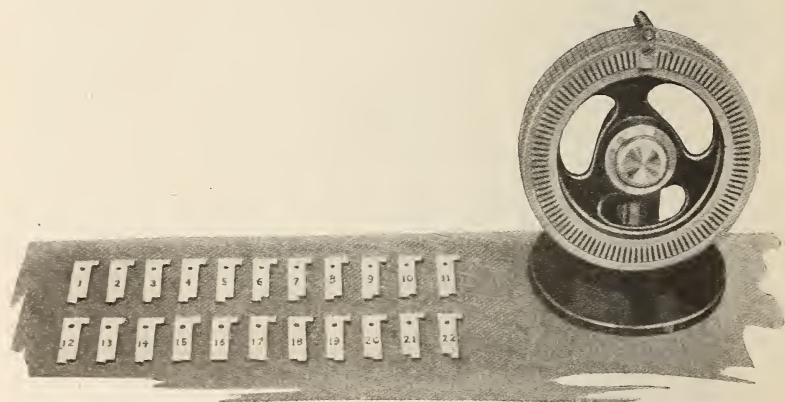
Printer No. 4—Automatic. Key-wheel and Keys.
